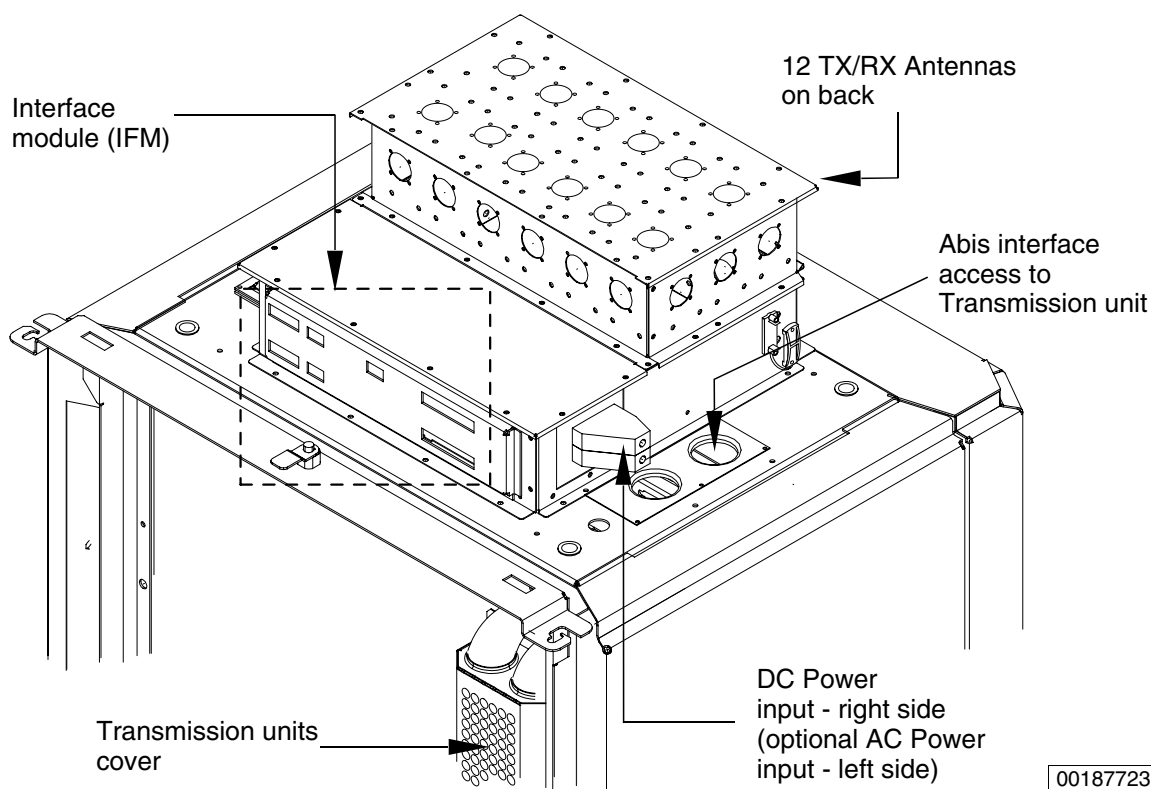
Outdoor cabinet interfaces (OAKx roof and door not shown)
